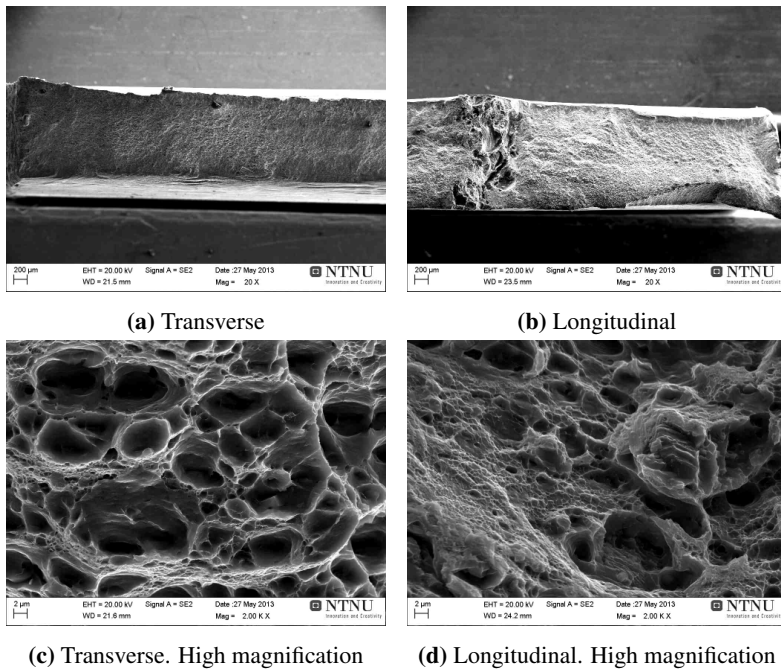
Fracture surfaces of the FZ tensile specimens representing the transverse, and the longitudinal direction.
